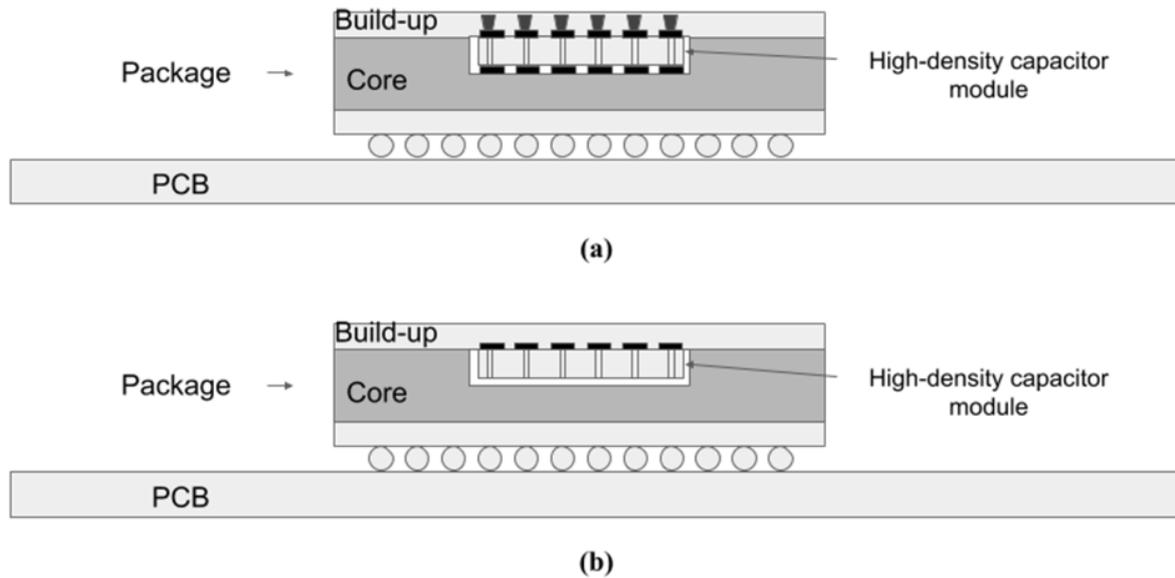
Cap module integrated into a package core cavity; (a) with pads; (b) without pads
